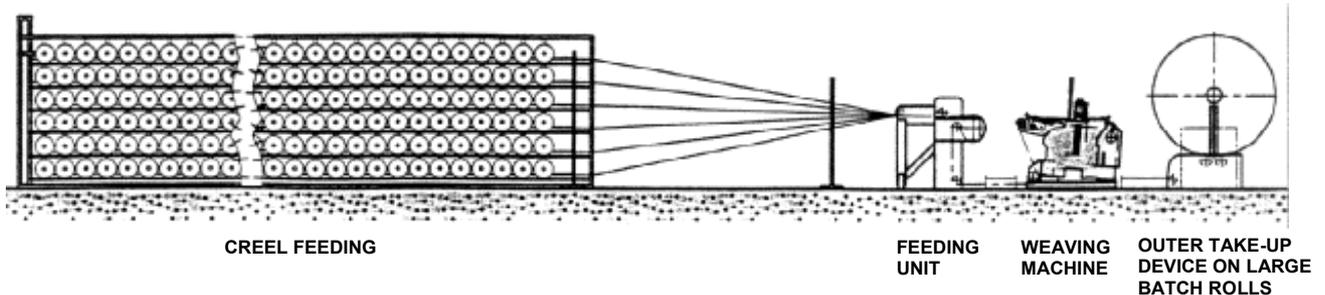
Weaving machine equipped with creel feeding and outer take-up device on large batch rolls (2000 mm diameter), used only for particular needs, like technical fabrics
